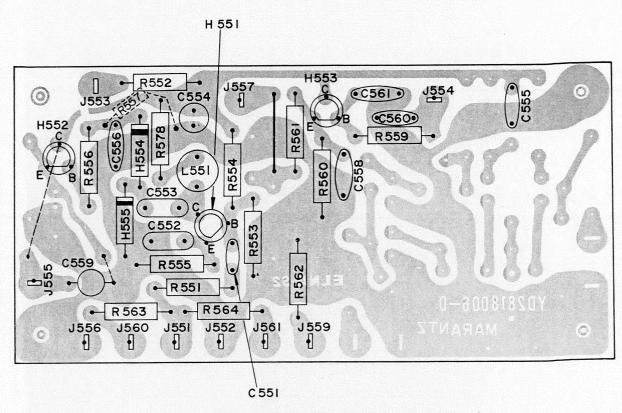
Muting Control Amplifier Assembly P550 Component Locations
